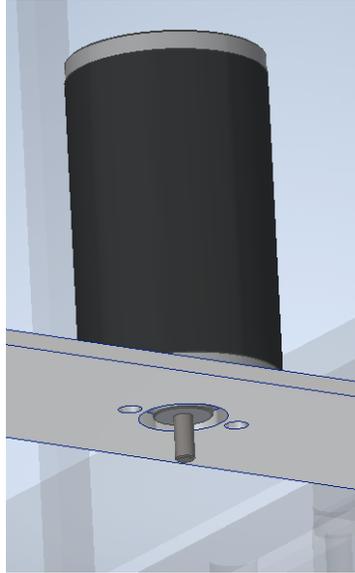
A BAG motor mounted to a flat bar on the 2019 robot. The holes are for bolts which are not modelled, and a pulley on the output shaft is hidden.
